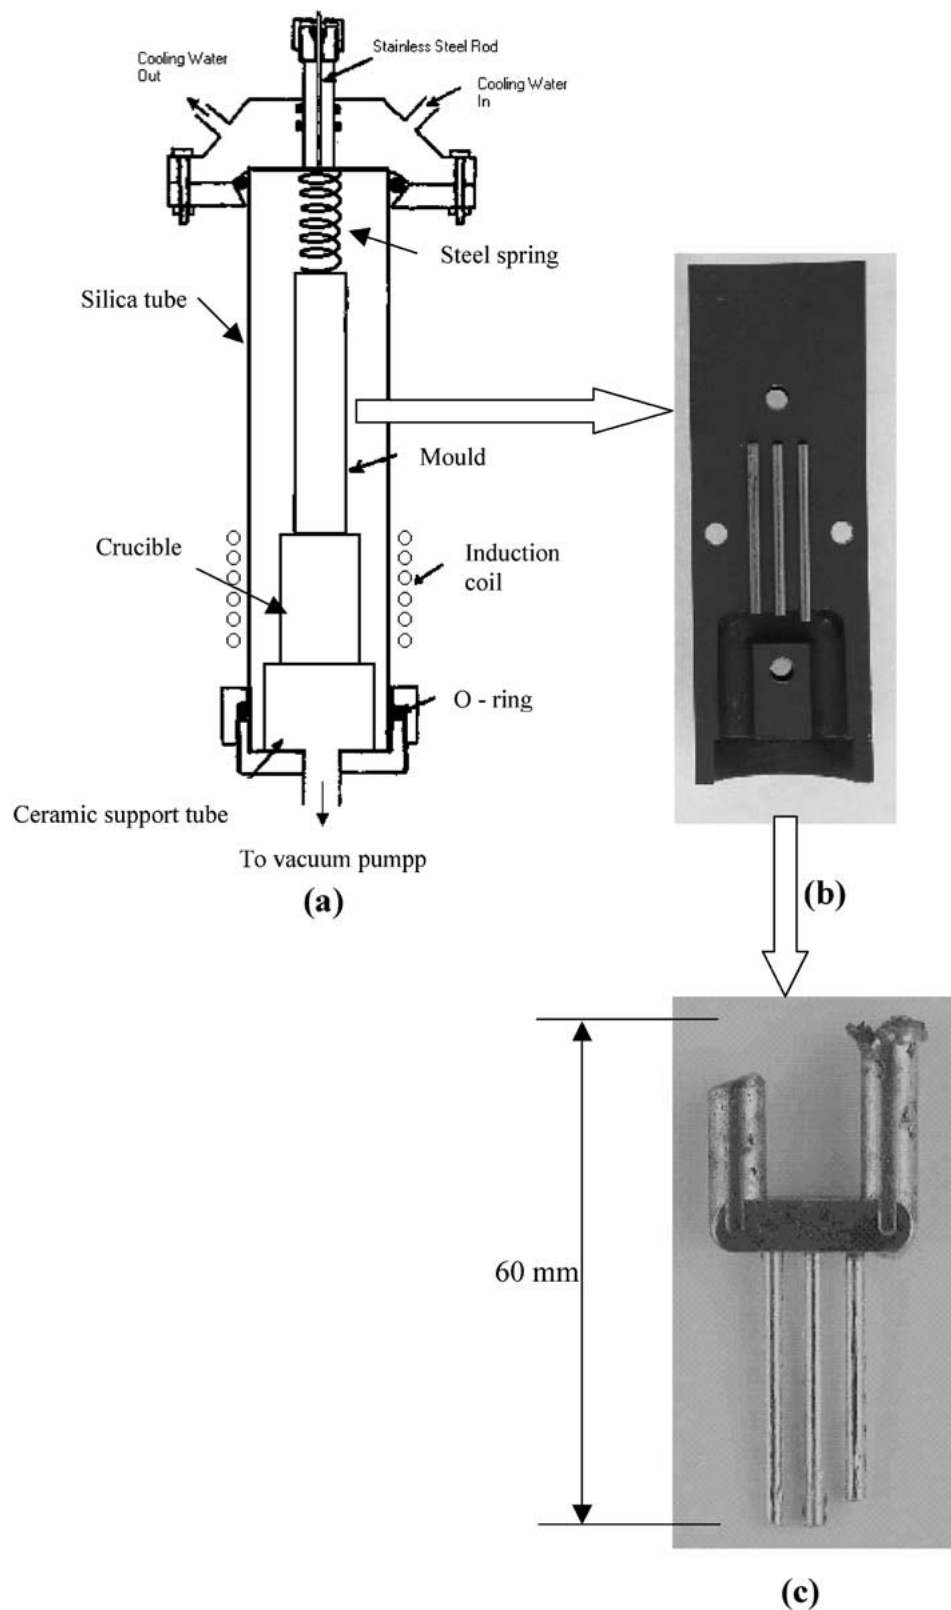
The details of casting coating technique. (a) Vacuum induction furnace set-up. (b) Graphite mould and solvent rods. (c) Cast coated solvent rods.
